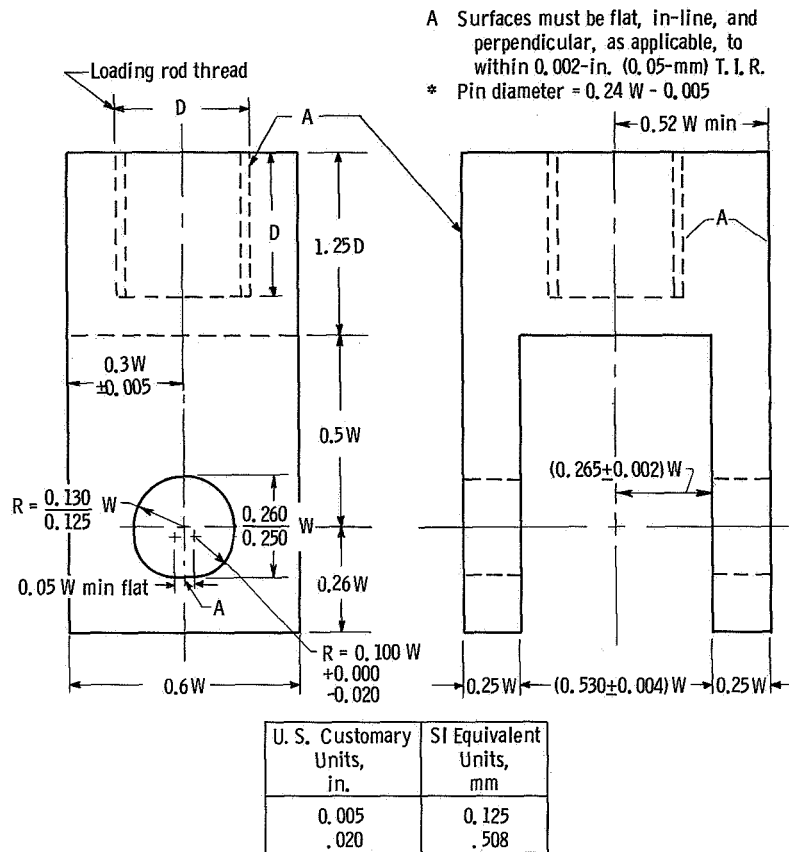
Tension testing clevis. (All tolerances in inches.)
